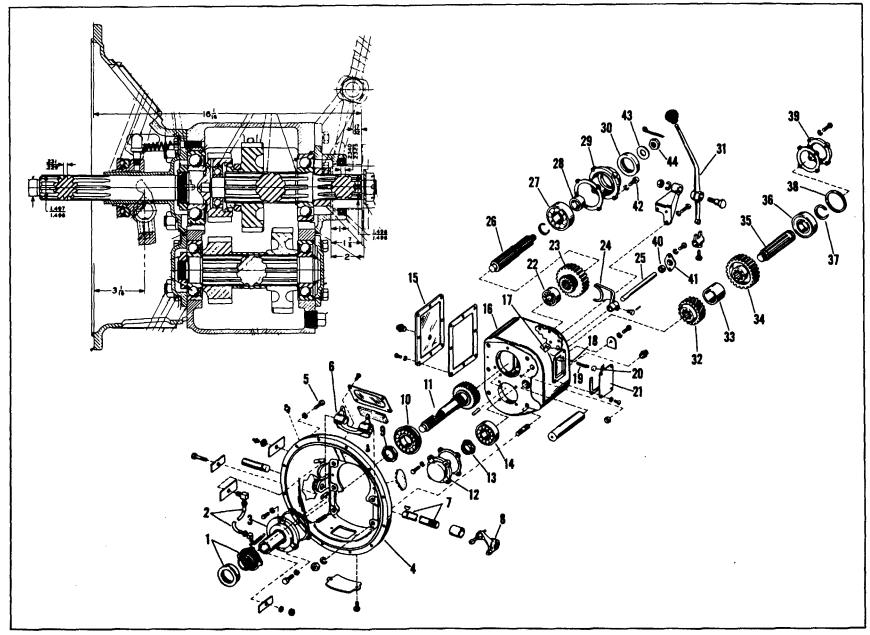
Sectional and Exploded View of Rotor Drive transmission
